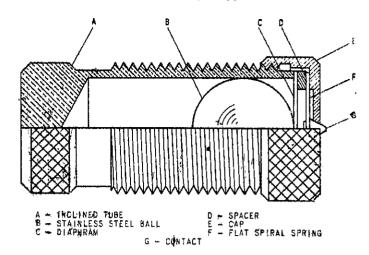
(K-6077069-3) Stationary Contact Assembly
